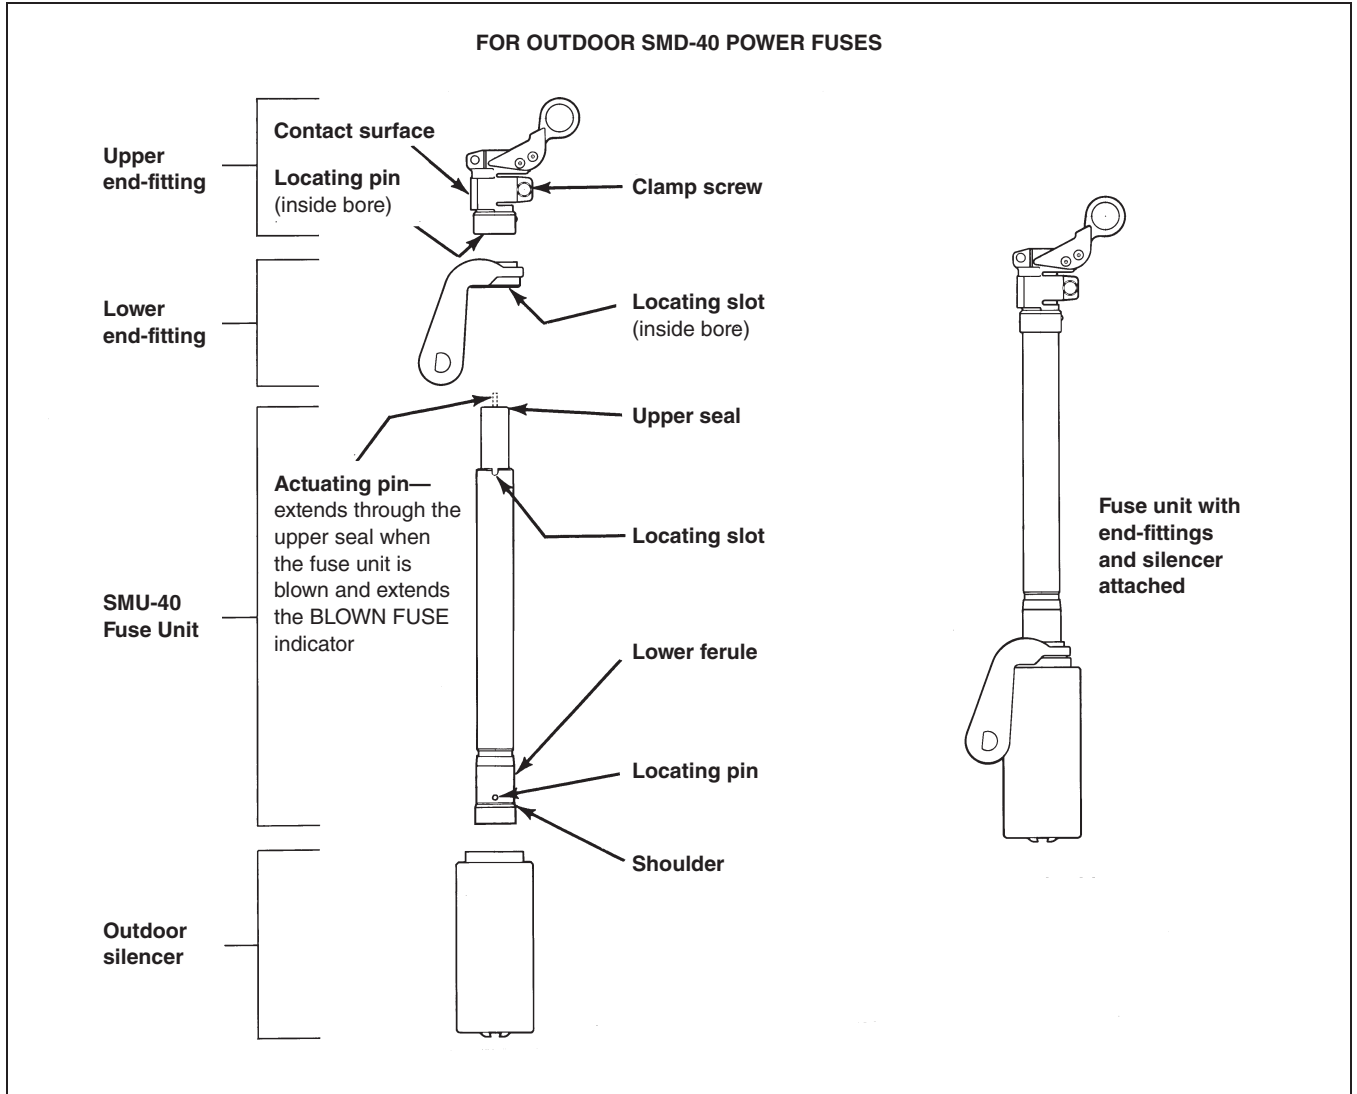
SMU-40 Fuse Unit with end-fittings and silencer for use in outdoor SM-40 fuse mountings.
